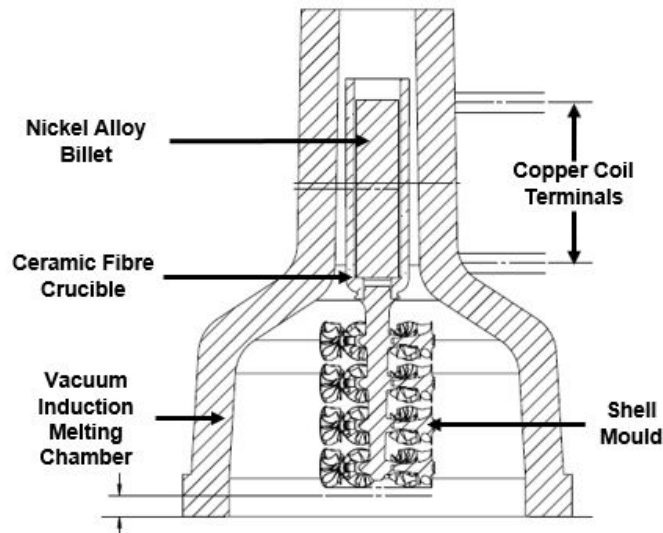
VIM combined with direct pouring into investment casting mould setup
